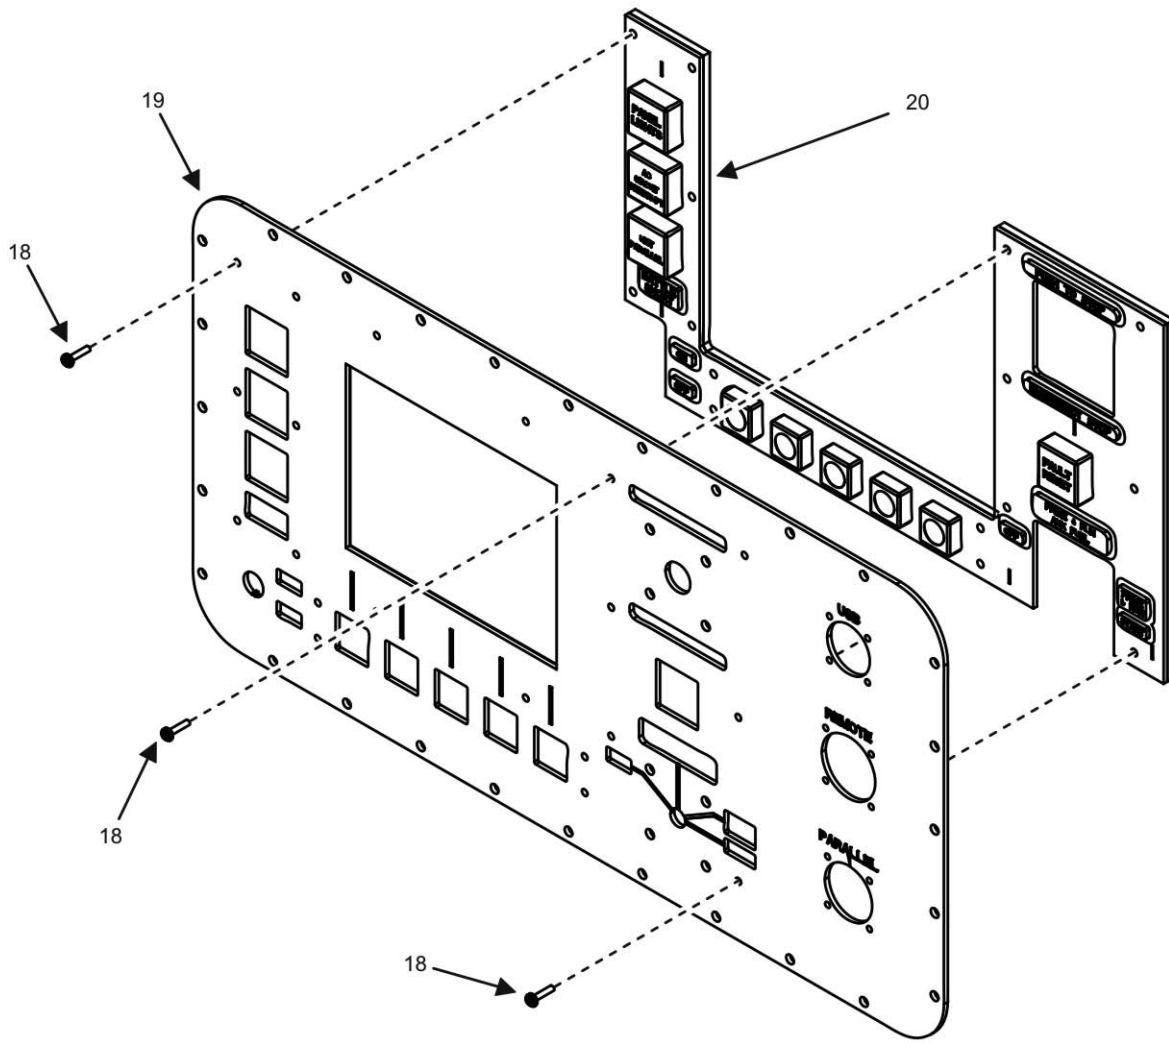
DCS Control Panel Assembly (Sheet 4 of 6).
